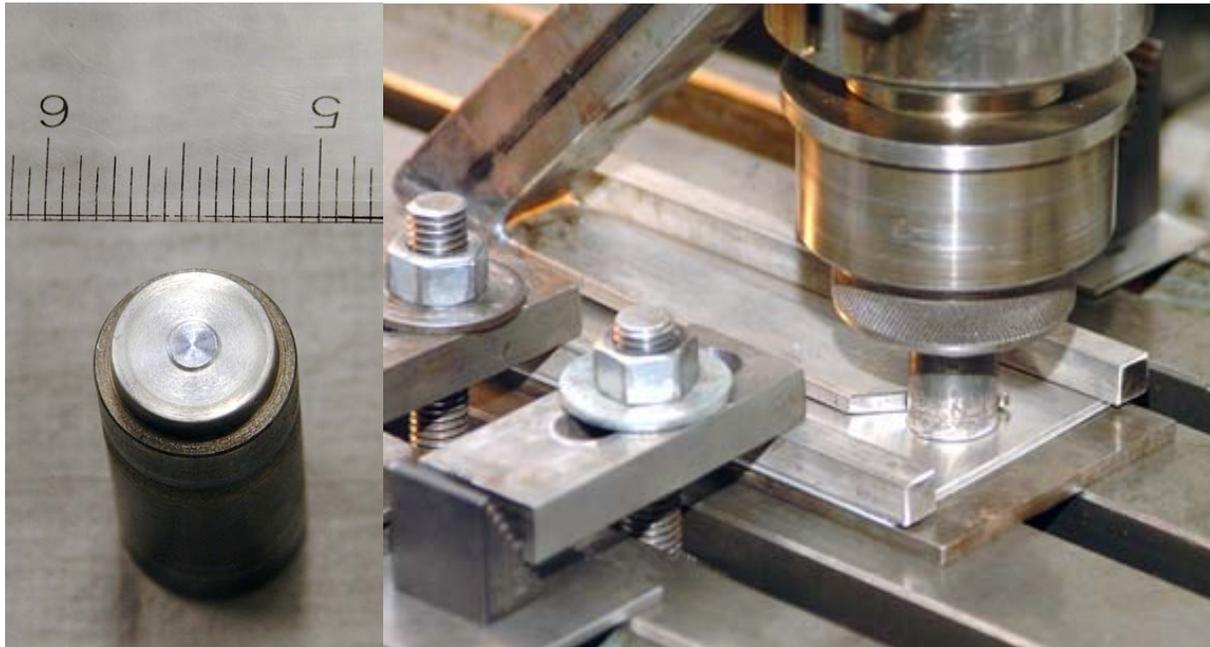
Friction Stir Welding. The view of the face of the tool (left) shows the pin in the center of the shoulder on the shaft. The pin is forced into the metal up to the shoulder which rides on the metal surface during processing. At right is shown the apparatus. The pin is rotated by a standard milling machine as the plate assembly is fed right to left. The sled (to the left of the tool) constrains the material in front of the tool aiding in a quality weld.
